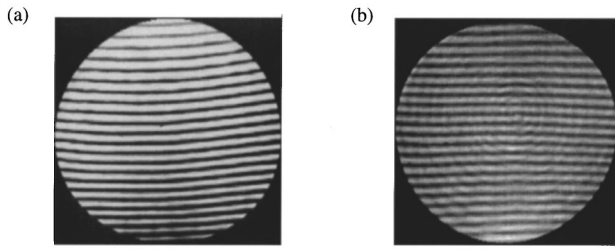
Typical IR wedge fringe patterns for (a) a machined surface (b) a painted surface.
